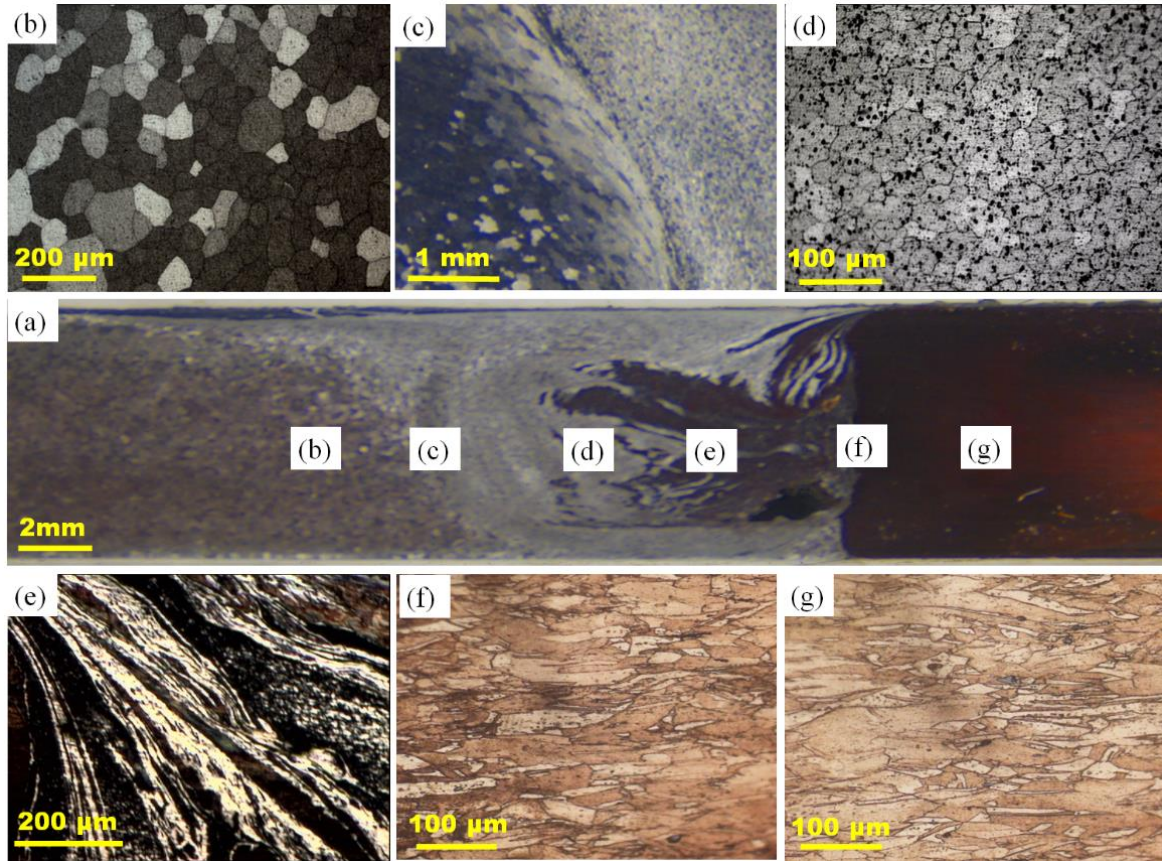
Microstructures of different zone at welding condition of 2 mm of tool offset, 815 rpm, 98 mm/min welding speed and with preheating current of 55 A: (a) macrograph of weld zone, (b) HAZ in the aluminium side, (C) TMAZ in the aluminium side, (d) SZ in the aluminium side, (e) SZ in the copper side, (f) TMAZ in copper side and (g) HAZ in the copper side.
